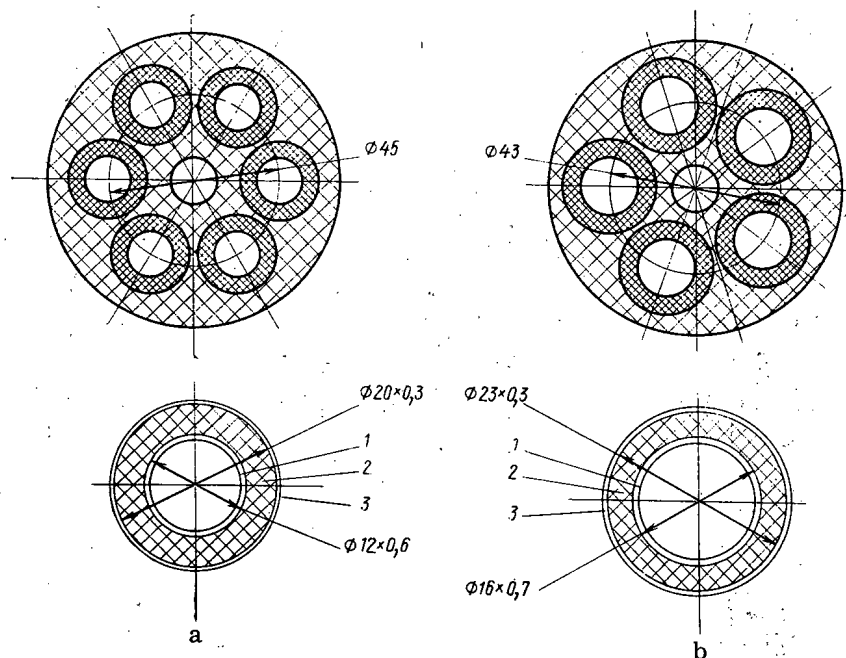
Cross section of the U-shaped channel and the fuel element: Six-element channel (a); five-element channel (b); 1) inner tube of the fuel element; 2) fuel composite; 3) outer can of the fuel element.
